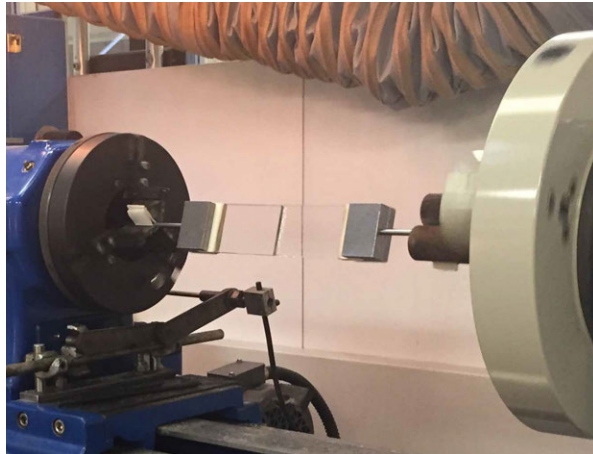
Jig set-up with steel clamps fixed to lathe to allow for rotation of specimen during welding process
